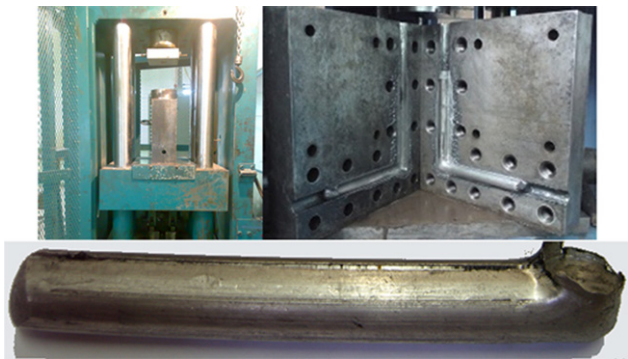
Hydraulic press, ECAP die and AL billet after one pass pressing.
